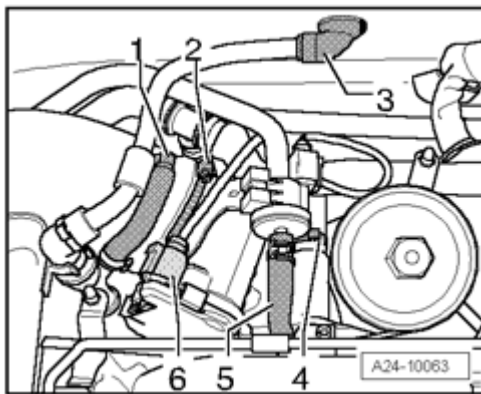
Disconnecting Throttle Valve Control Module J338 Electrical Harness Connector
